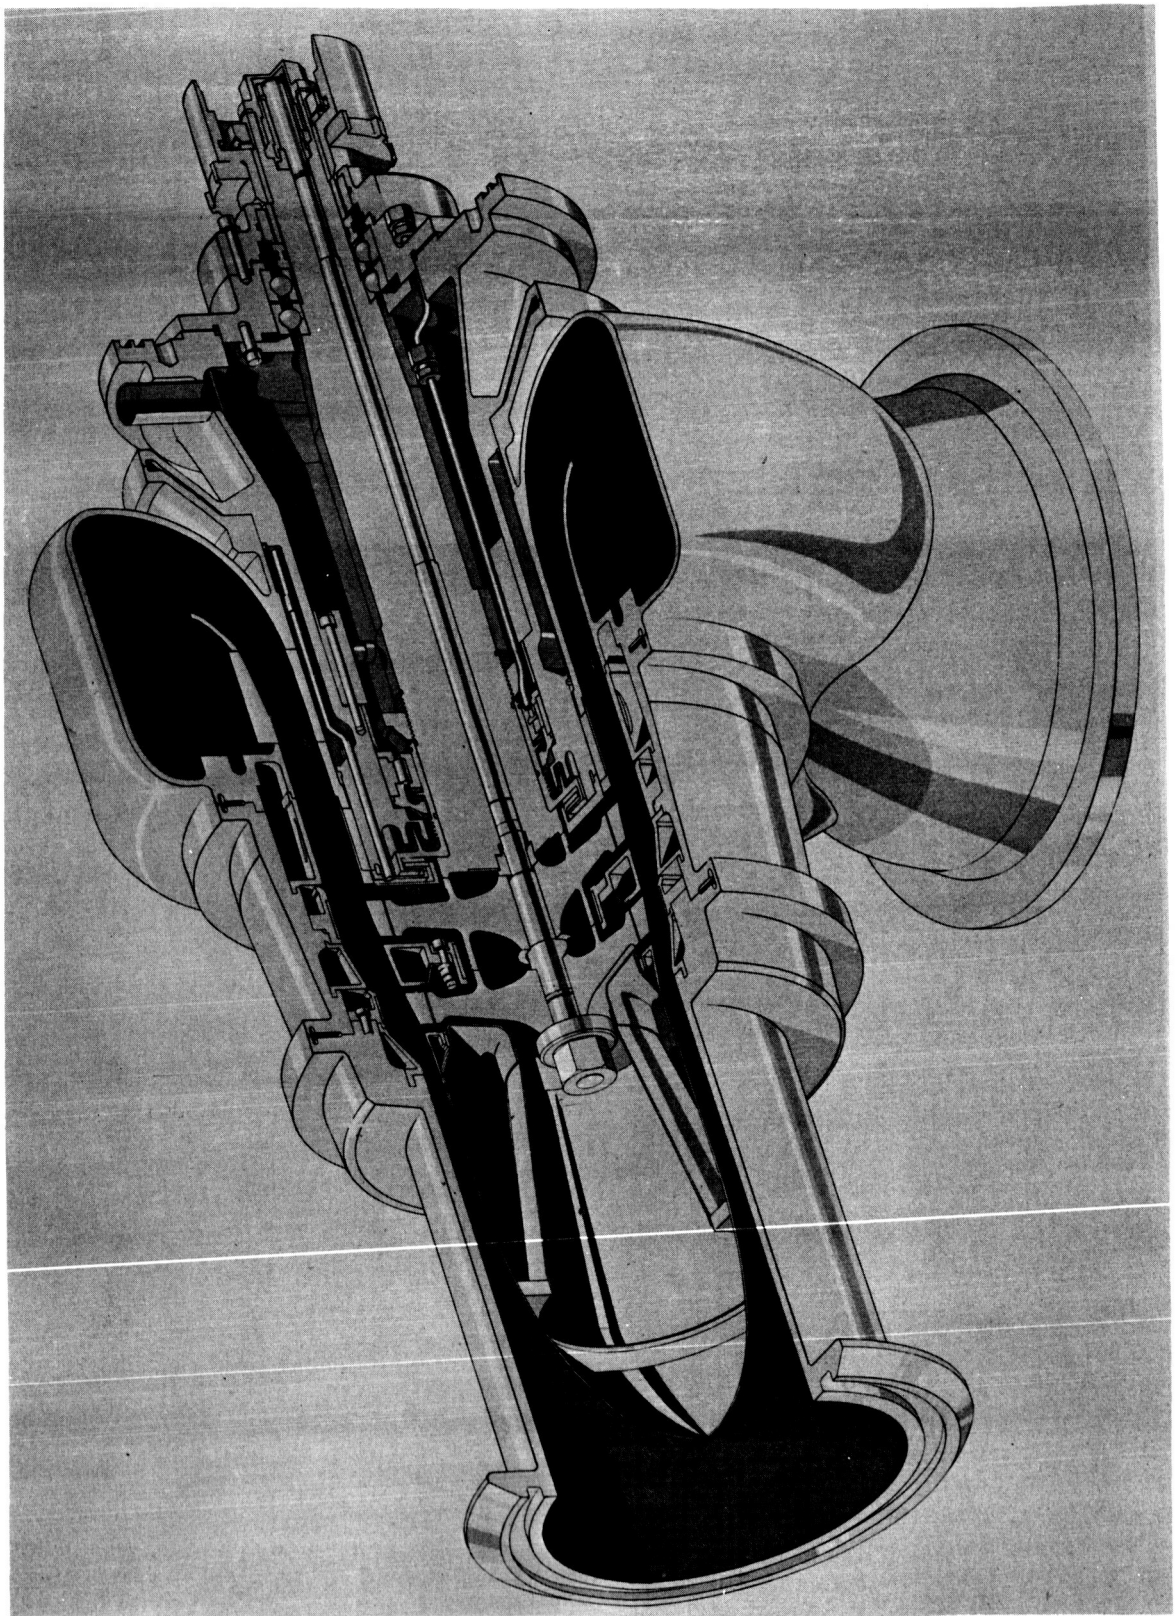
Isometric Drawing of the Two-Stage Turbine.
